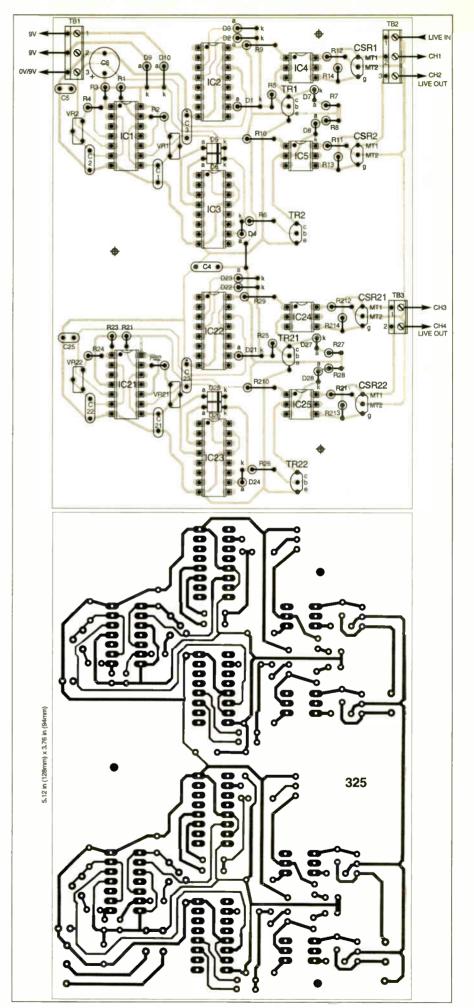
Twinkling Lights four-channel printed circuit board component layout and fullsize copper track foil master pattern.
